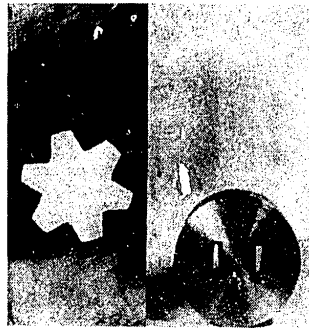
Examples of electric-discharge machining on the VJK 5 machine.
